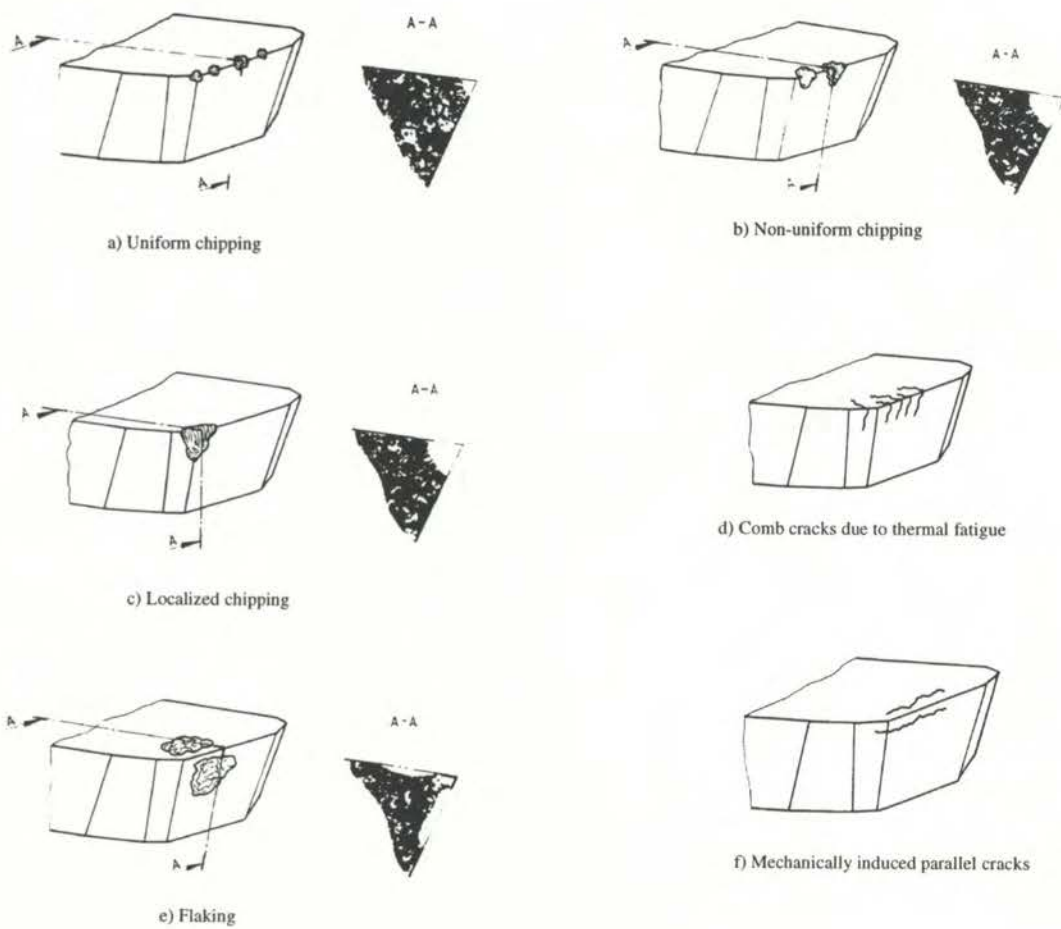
Definition of chipping, flaking and tool cracks according to ISO 8688-1 [124].
